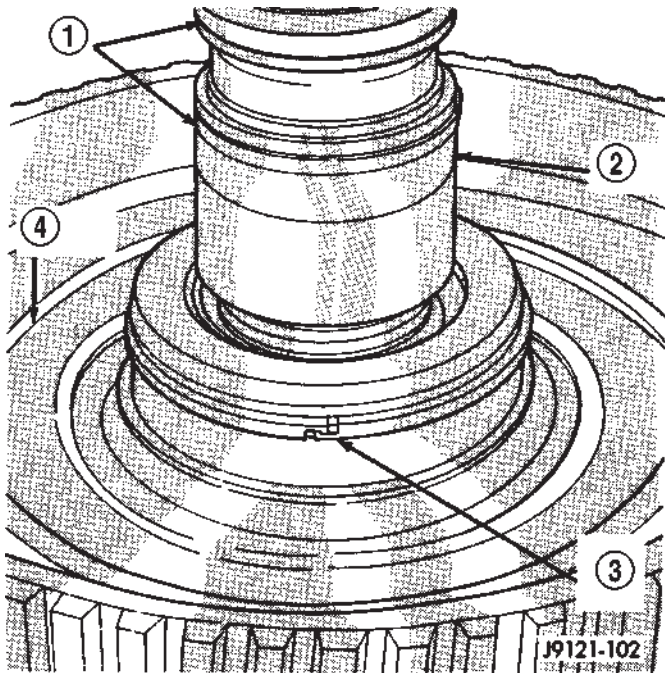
Input Shaft Seal Rings And Thrust Washer
